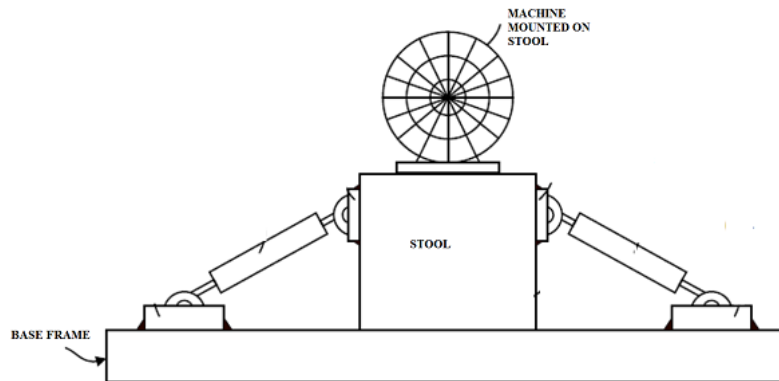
Stool holding device using turn buckle arrangement to prevent swaying
